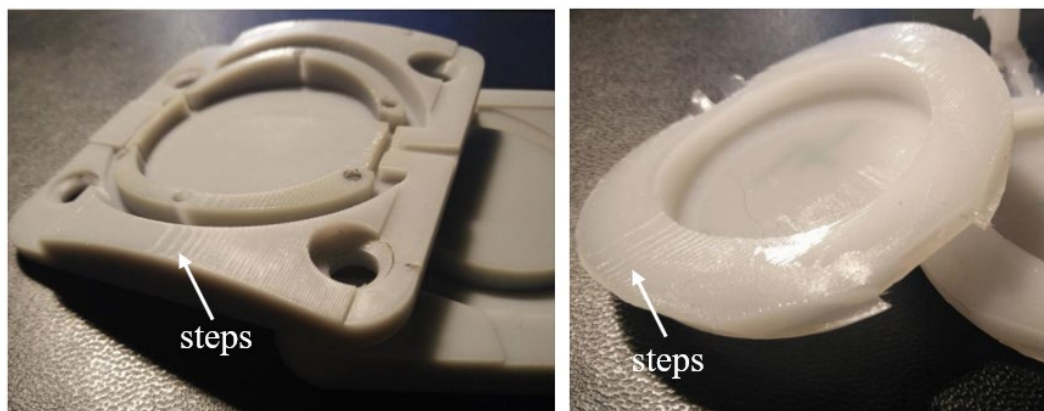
Viper Si2 SLA horizontally printed inserts using Accura Extreme (left) and the molded cosmetic compact base (right).
